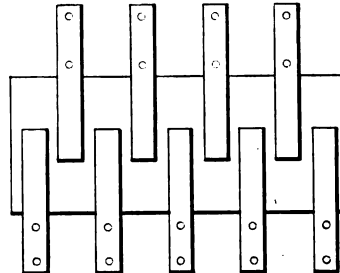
Plan View, Showing Manner of Adjusting Hand Screws.
